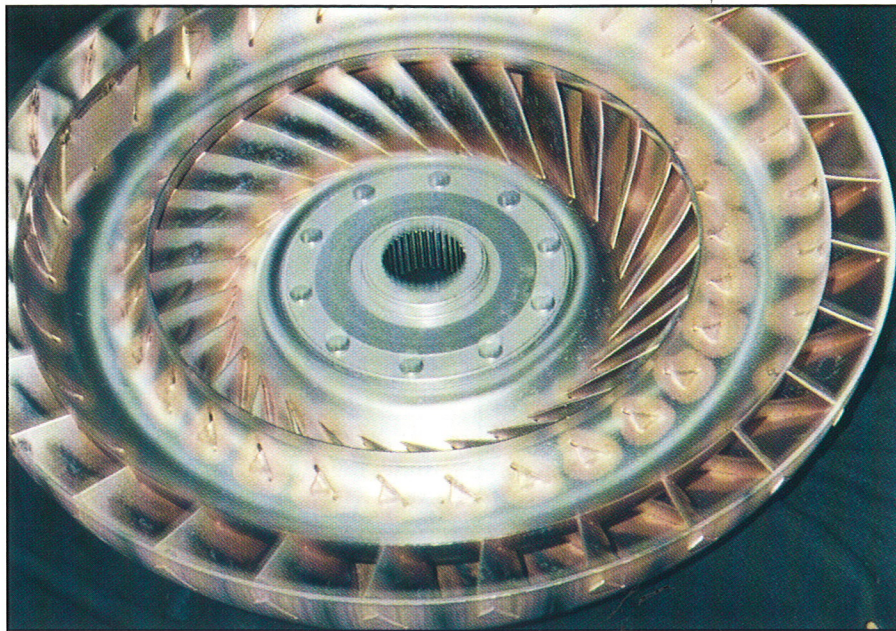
Copper brazed part assembly processed in partial pressure to prevent evaporation.
